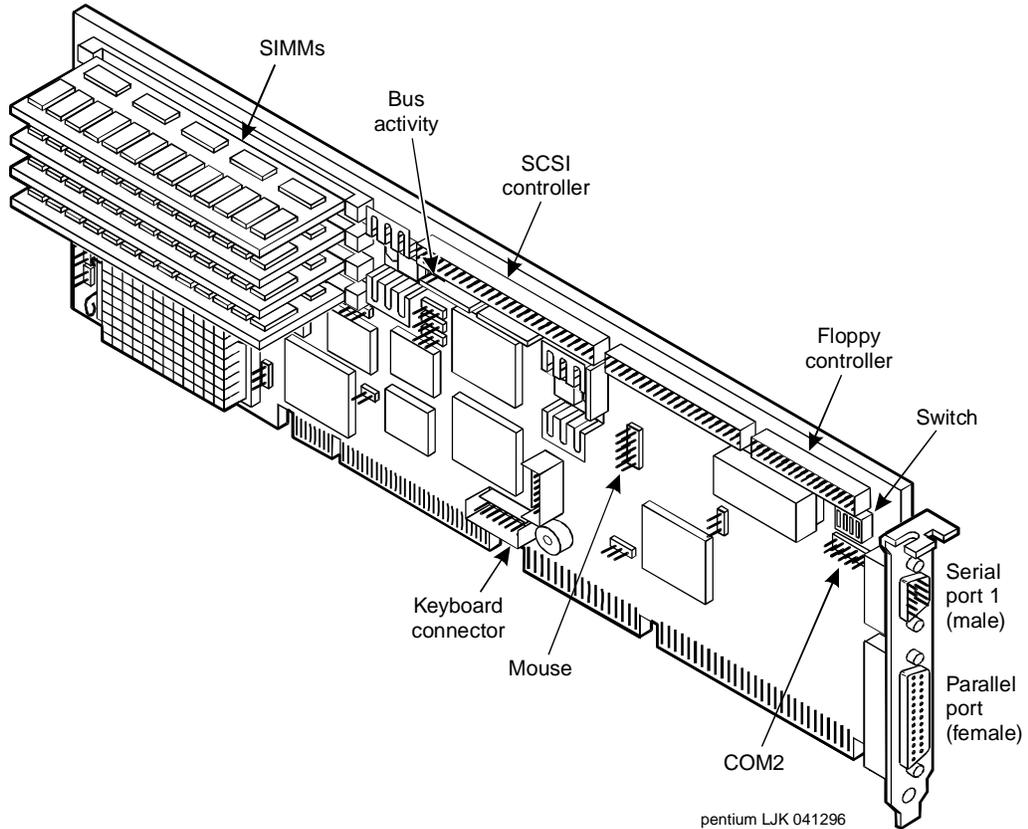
P575/CPU Circuit Card and Jumper Locations
